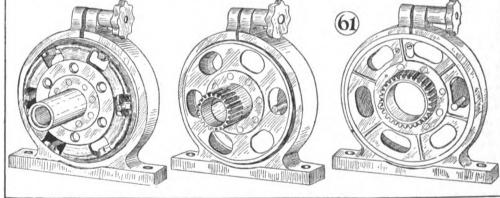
A transmission drum clamping device for holding the drums while reaming the bushings. The tool is bolted to the bench and the faces of the drums are not injured
